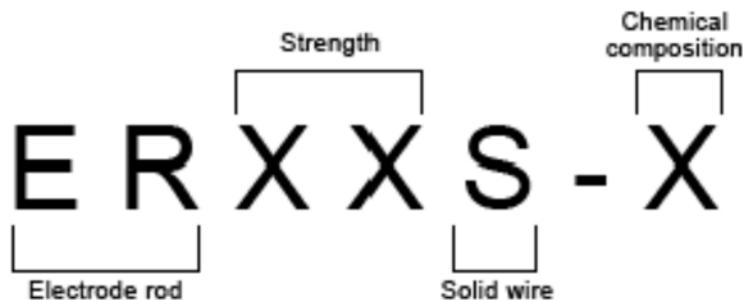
GMAW/GTAW/PAW Welding Electrode Identification System
